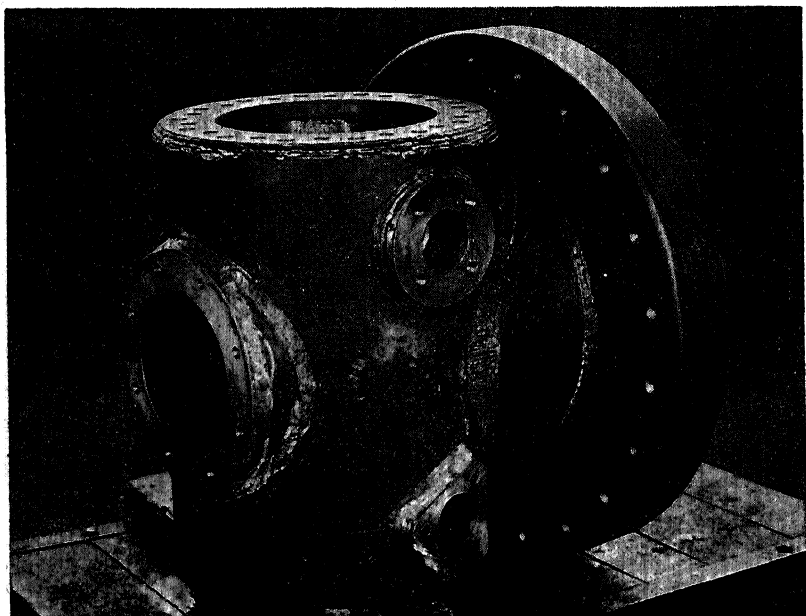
Cylinder head for large gas engine fabricated from steel plate and pipe. Weighs 1370 lbs. as compared to 1940 lbs. for the casting which it replaced.
